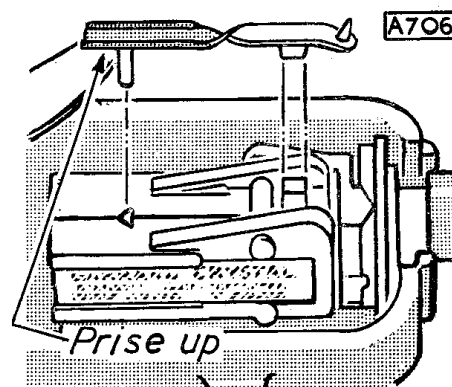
The pickup cartridge, showing method of removing stylus assembly.
